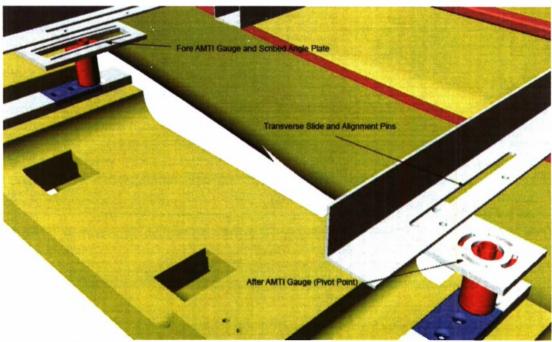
Detail of side hull cross structure and pivot arrangements. AMTI gauges mounted on starboard side hull only.
